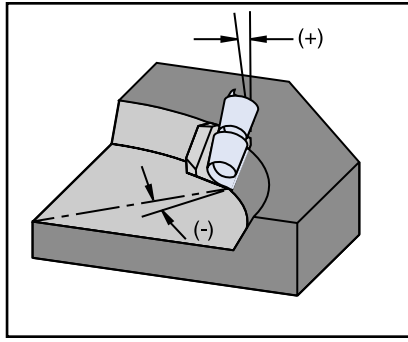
Shear-angle (negative radial and positive axial rakes) cutters have proven to be able to machine irons productively.
